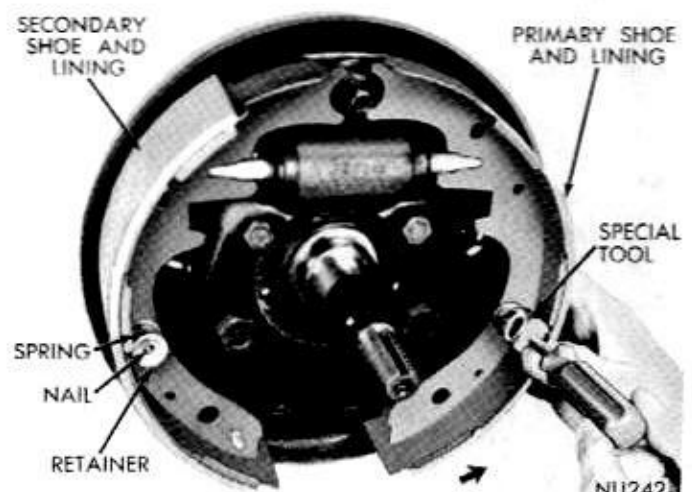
Removing or Installing Shoe Retainers, Springs and Nails (Right Foot)
